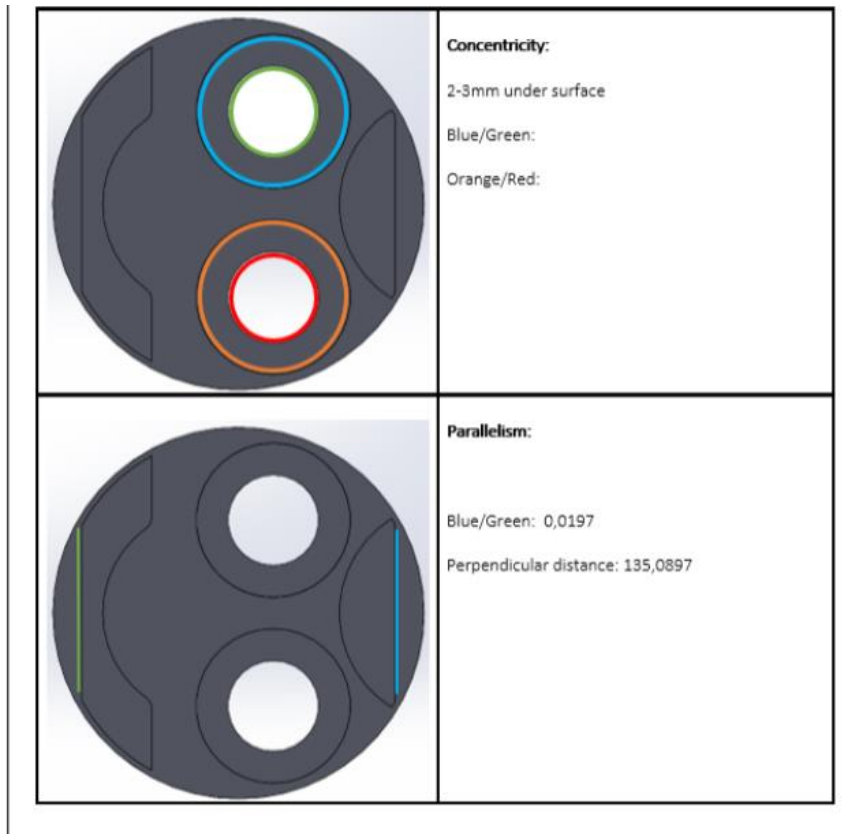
Geometrical and Dimensional Tolerance measurement – Data sheet Cast Iron-B-LN2.
